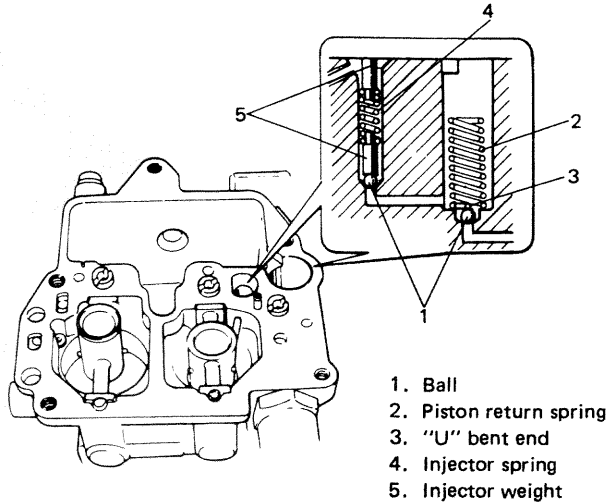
Installing balls, injector spring and weights, and piston return spring
